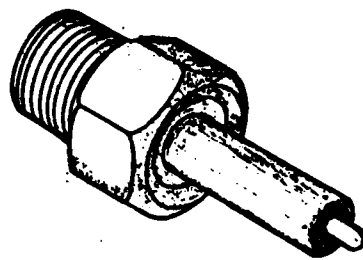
Exploded view of the air-tight bulkhead connector used as a feed-through for the water supply tubing.
